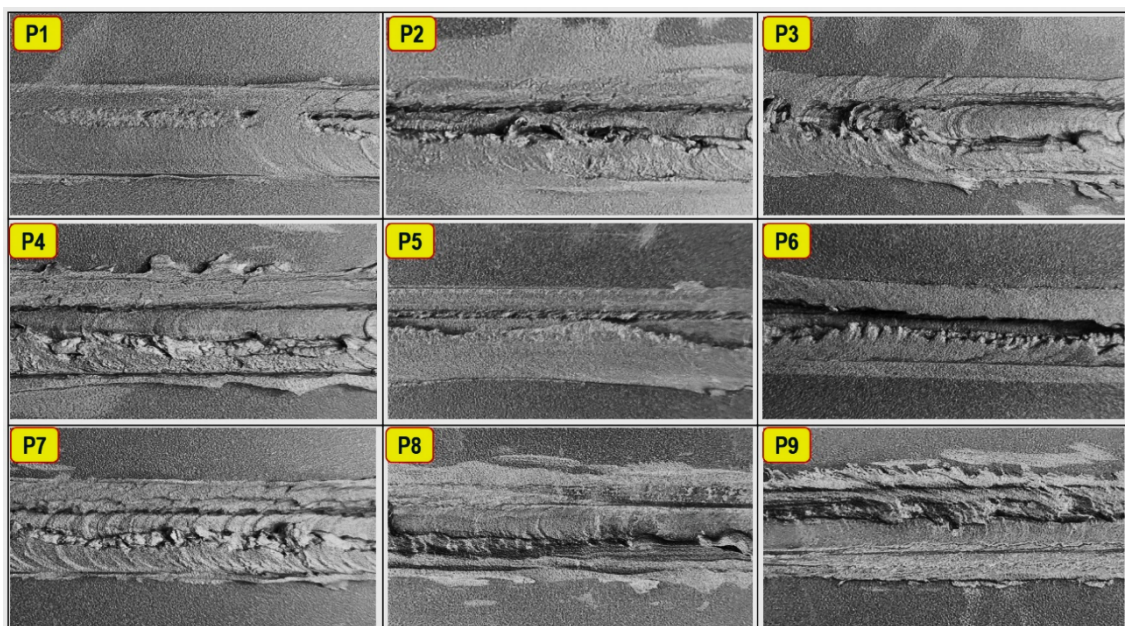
Weld top surface of AA7075 *UVaFSWed* shot-peened joints
